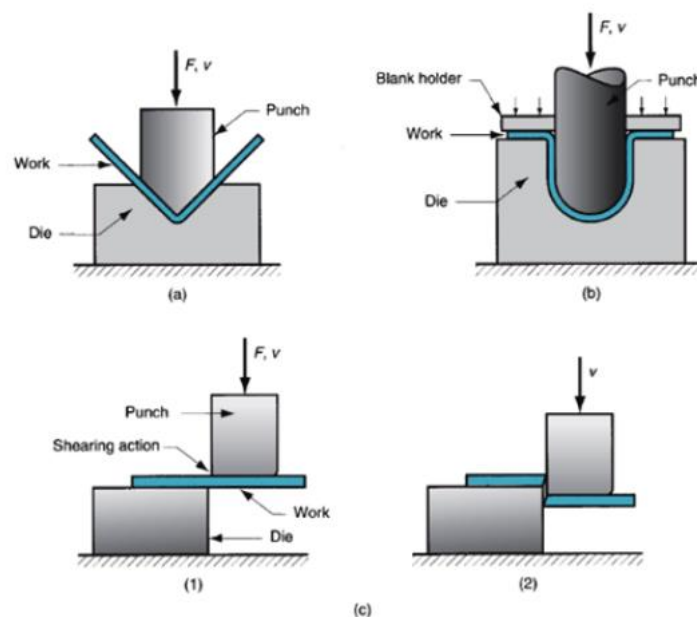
Basic sheet metal working operations: a) bending, b) drawing, c) shearing: 1) as punch first contacts sheet, and 2) after cutting (Groover, 2012)
